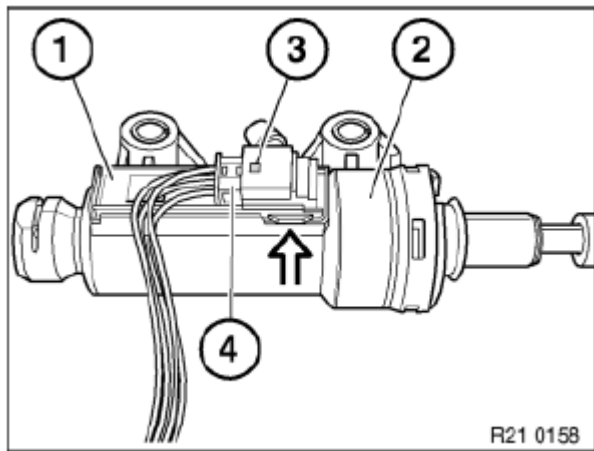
Identifying Clutch Switch Module And Clutch Master Cylinder
